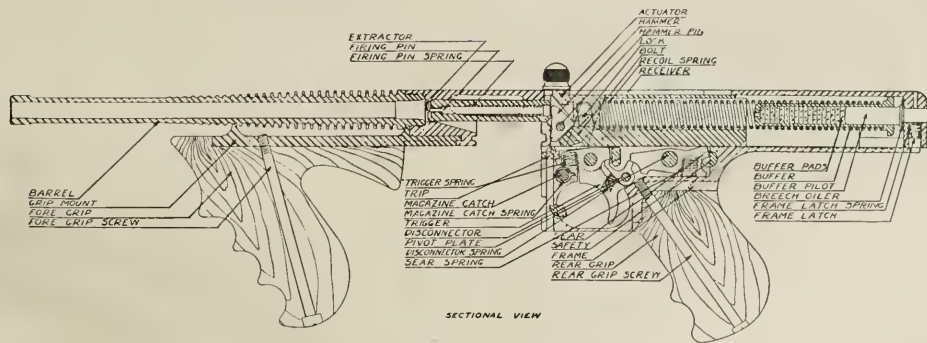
SECTIONAL VIEW OF THE SUBMACHINE GUN
